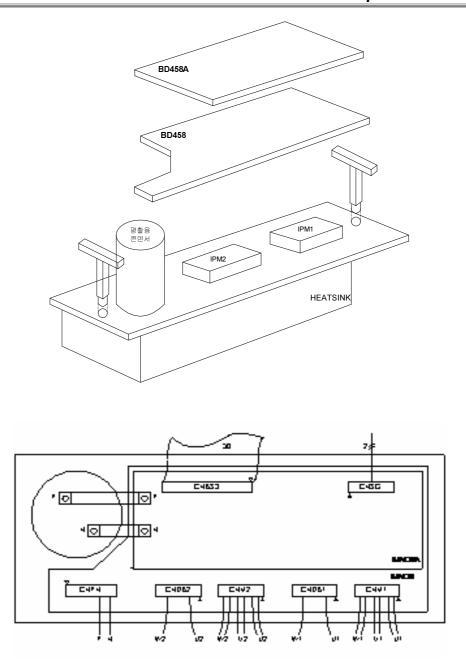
Parts Configuration of HSXY2 Drive Unit
